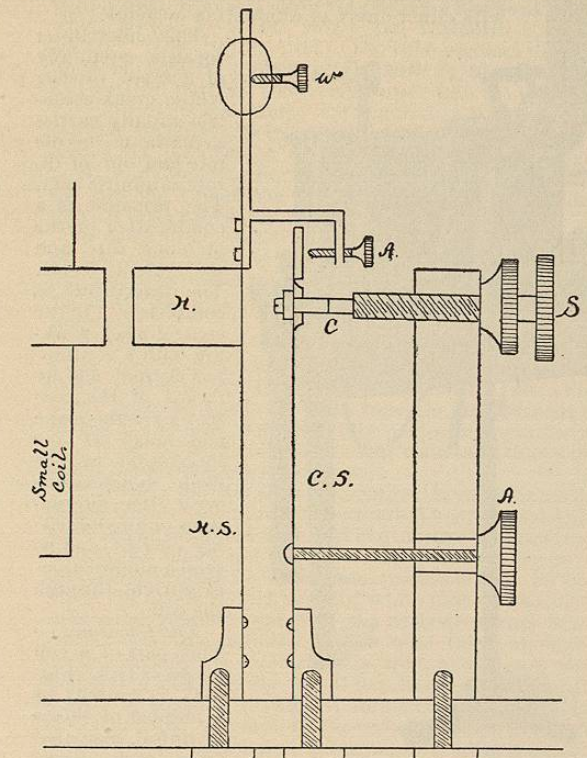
Diagram of Independent Vibrator. h, Hammer; w, movable weight; h. s., hammer spring; c, contact points; c. s., contact spring; A, S, A, adjusting screws.
